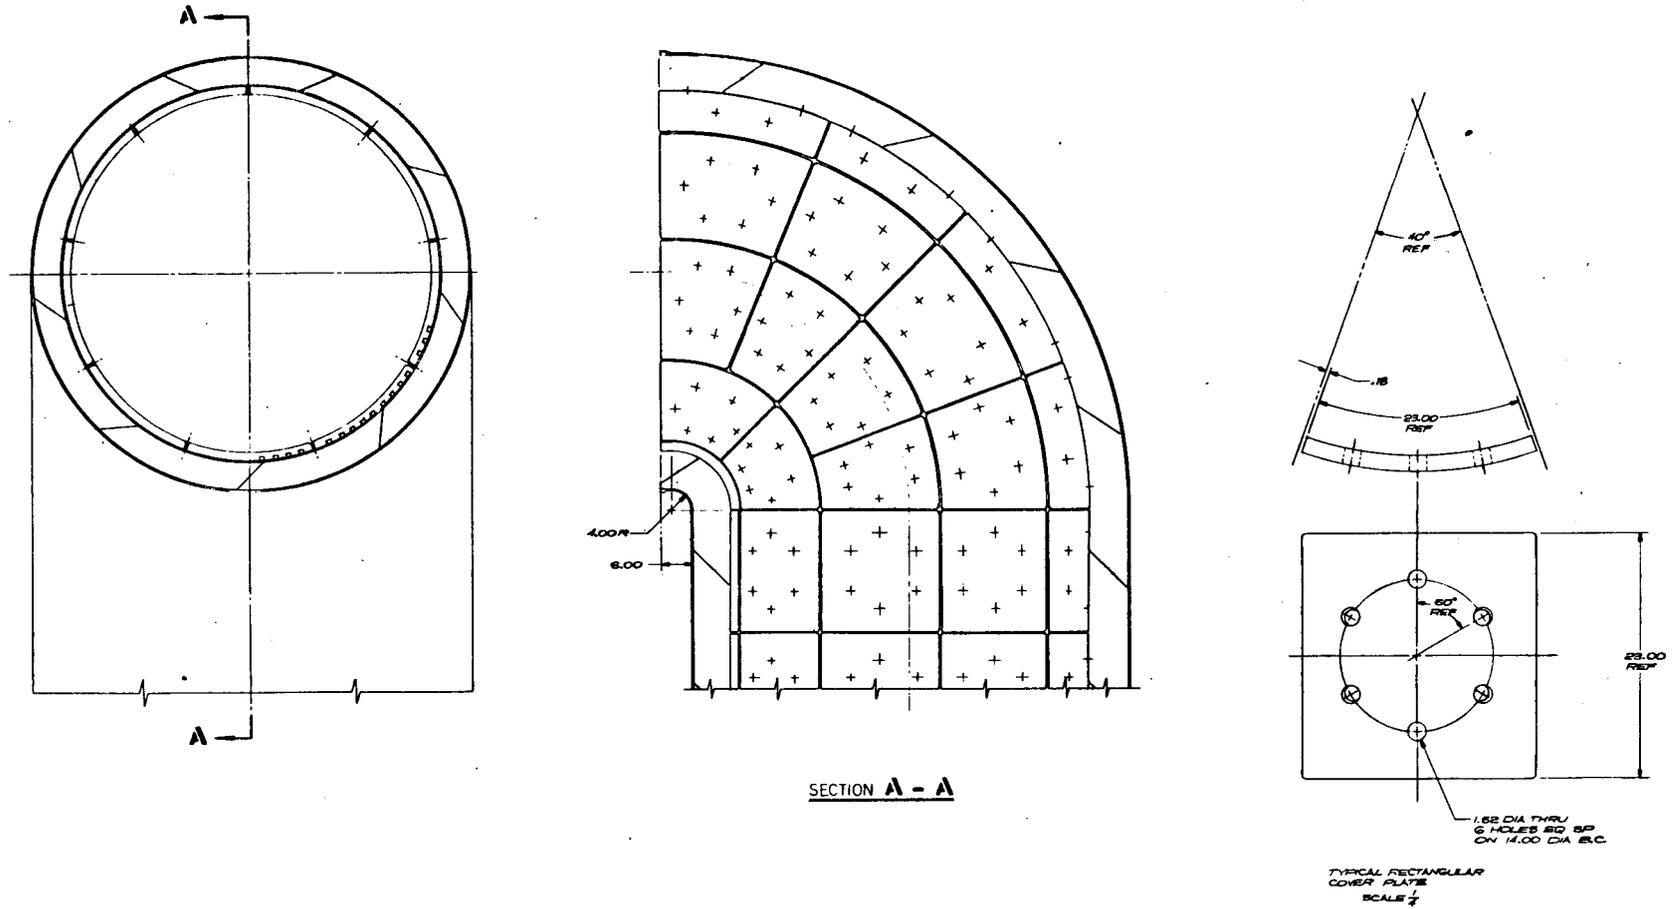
Alternate hot duct concept (sheet 2 of 2)
